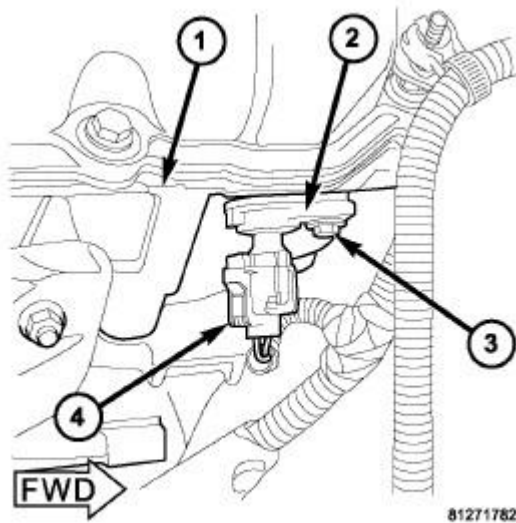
Cylinder Head, CMP Sensor, Retaining Bolt & Connector
